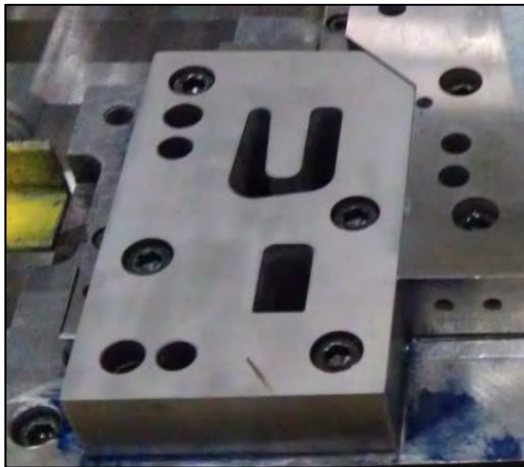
C-14: Caldie insert used to address wear and cracking issues on the blank die. ^{M-5}
